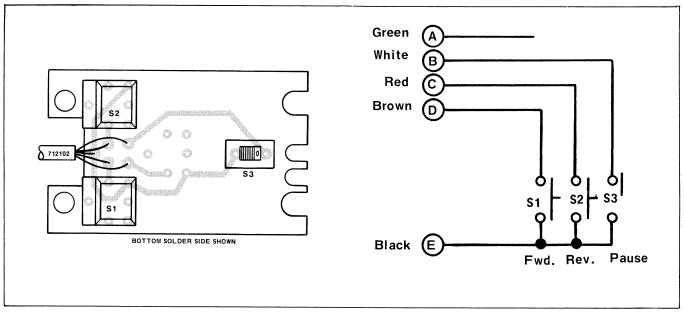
Remote Control Printed Circuit Board (Models 815, 820, 825A and 830 Only)
